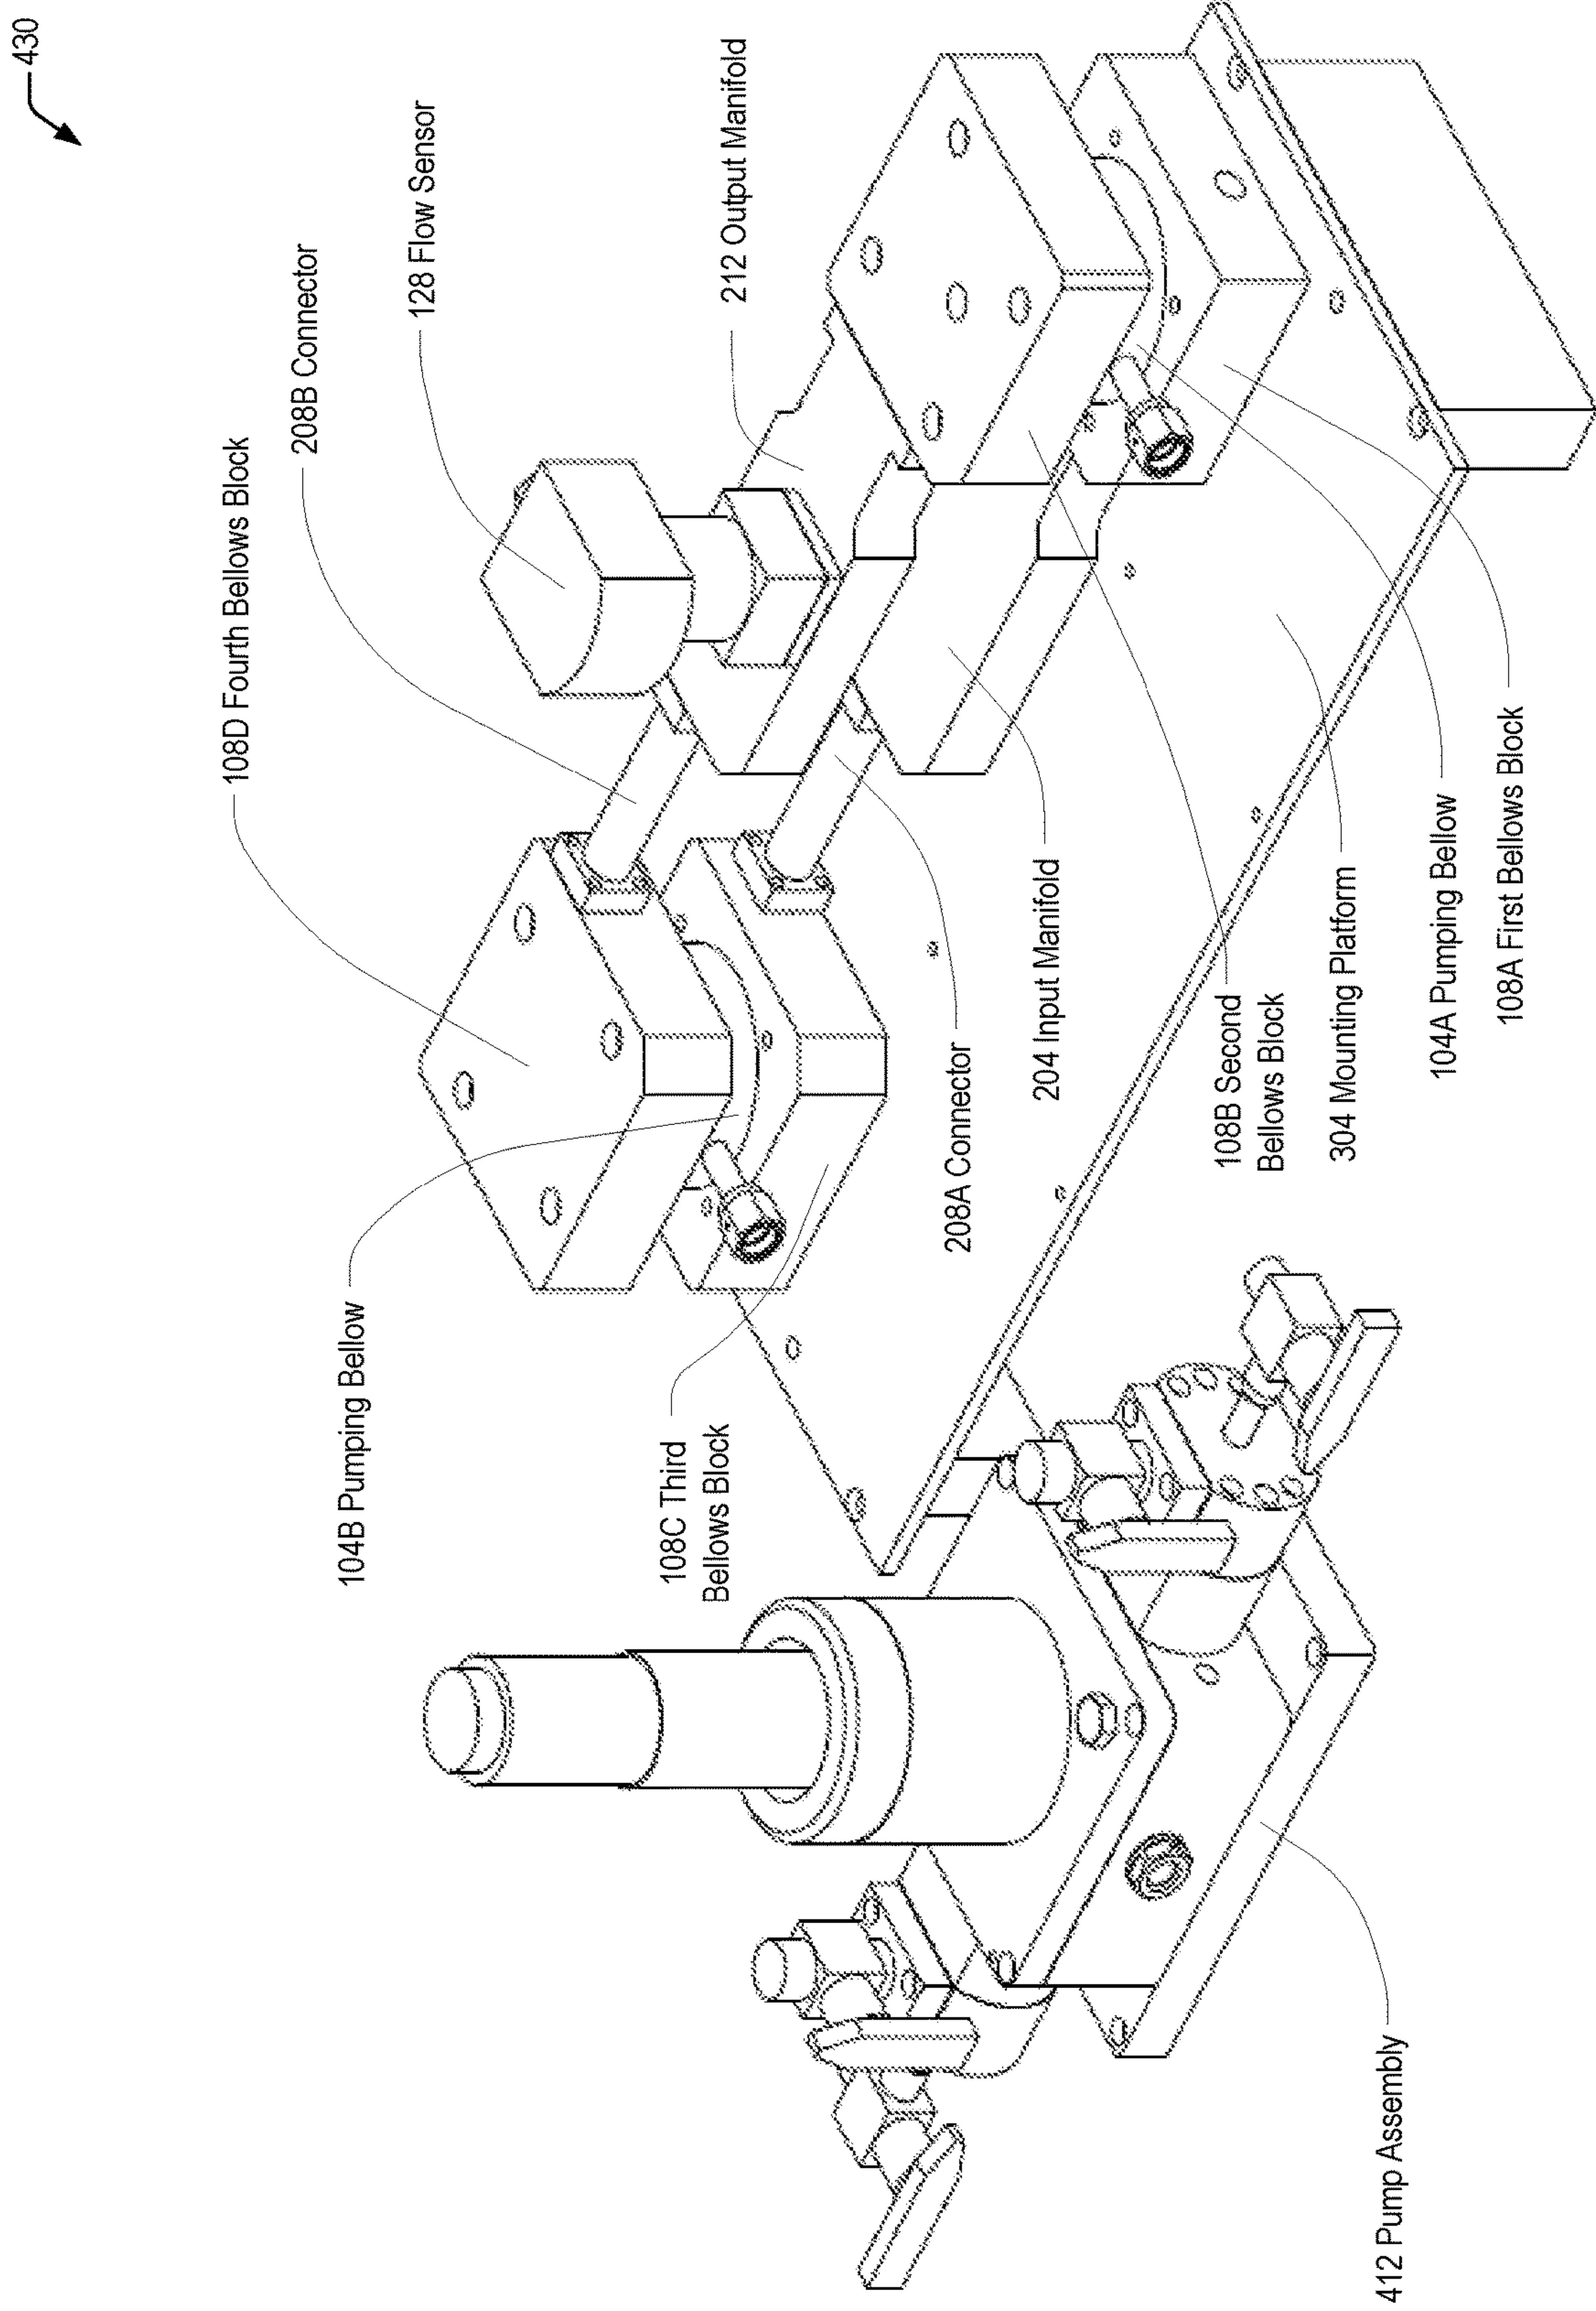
C Fluid Transfer System With Separated Upper and Lower Distribution Assemblies of Second Embodiment
